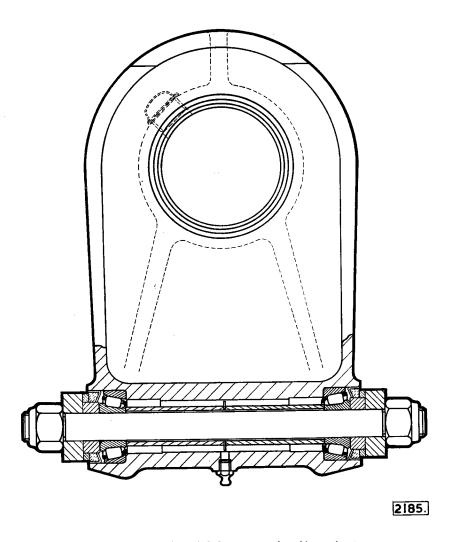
Section through hub carrier and wishbone showing outer fulcrum shaft in position.
